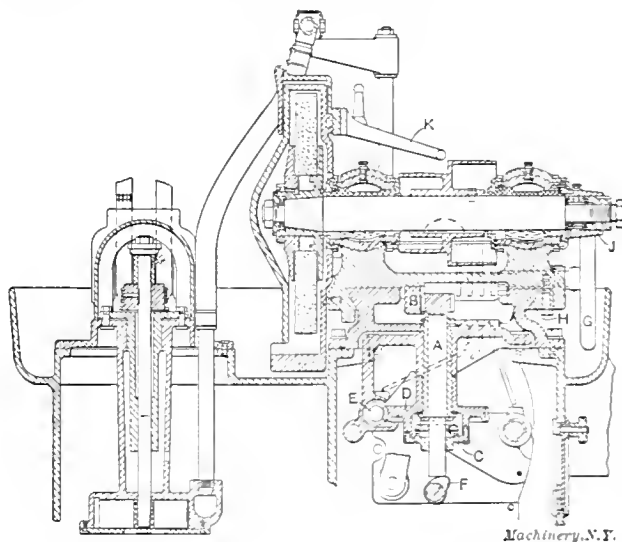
Cross-section through Grinding Head Spindle, showing Centrifugal Pump and Improvements in Cross Feed
